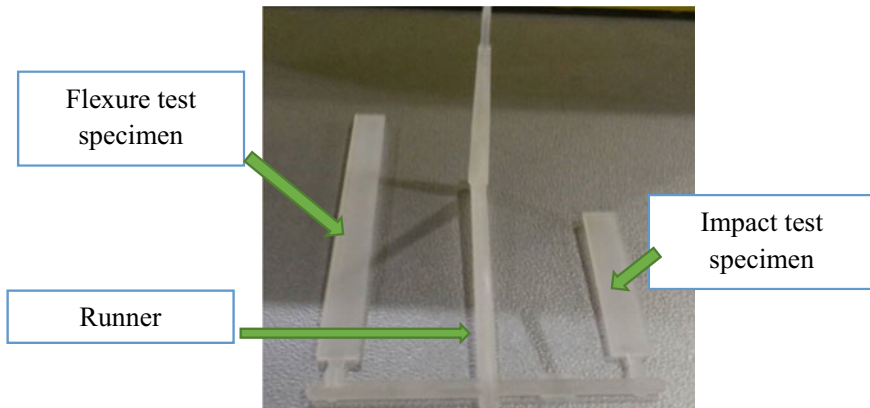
Specimens produced by injection molding process. First session of injection molding process producing specimens for impact and flexure test
